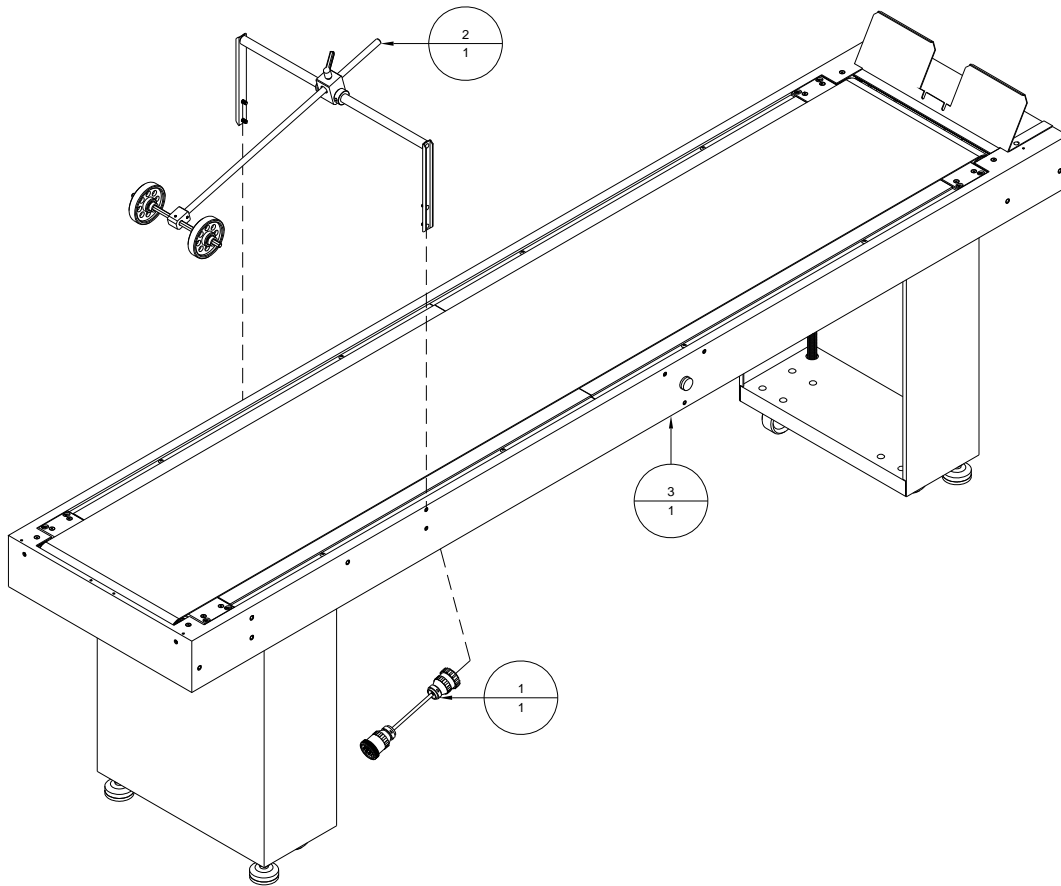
BK2108SBI-180 - Conveyor, 8' Solid Belt, Inline, 180 VDC
